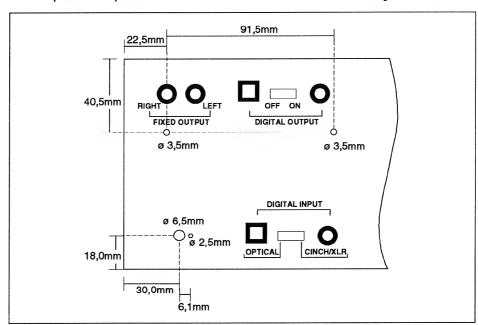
Mounting holes in the rear panel of the D740 and drill holes for the new switch.
